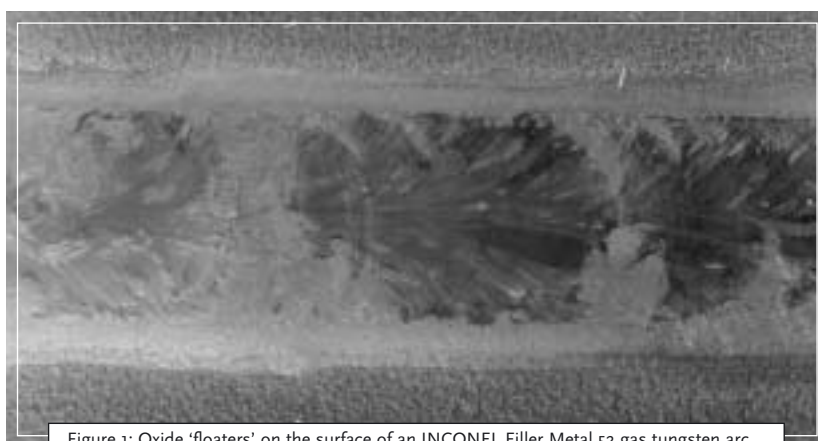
Oxide 'floaters' on the surface of an INCONEL Filler Metal 52 gas tungsten arc weld deposit
